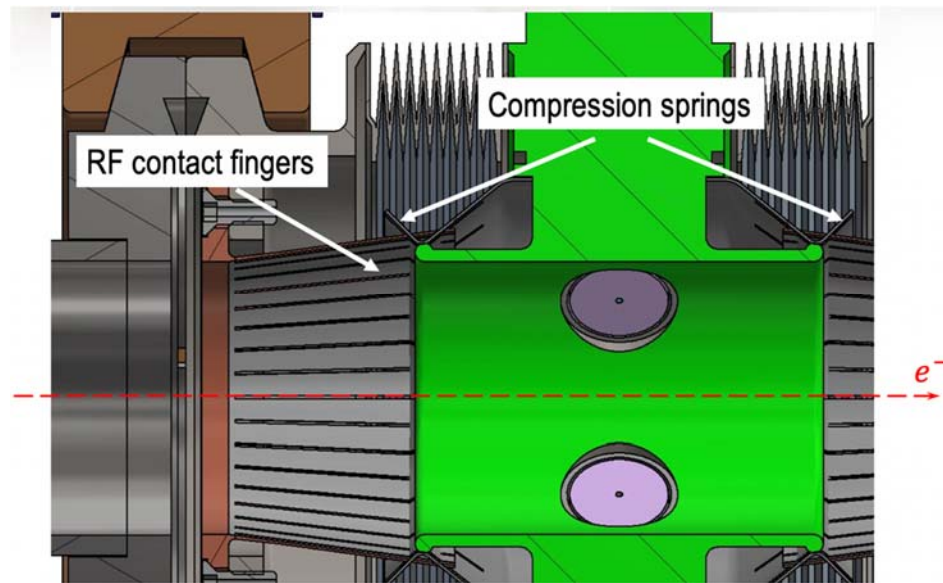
The internal view of the APS-U Bellows/BPM assembly.
